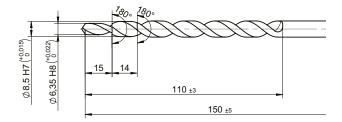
Step drill Type 1337A for mounting nur M10x1
